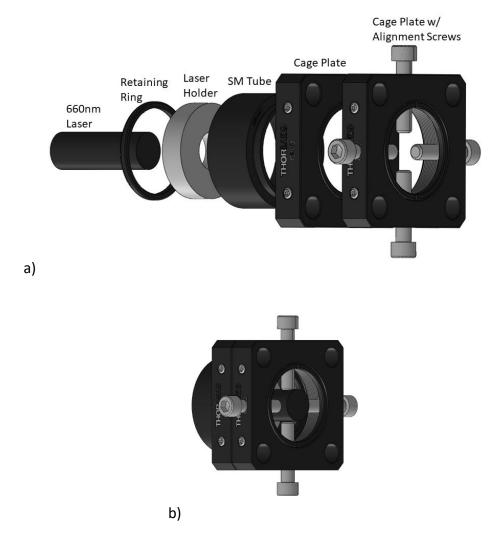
Laser setup with laser holder, SM tube, cage plates and alignment screws a) deconstructed for clarity and b) fully assembled.
